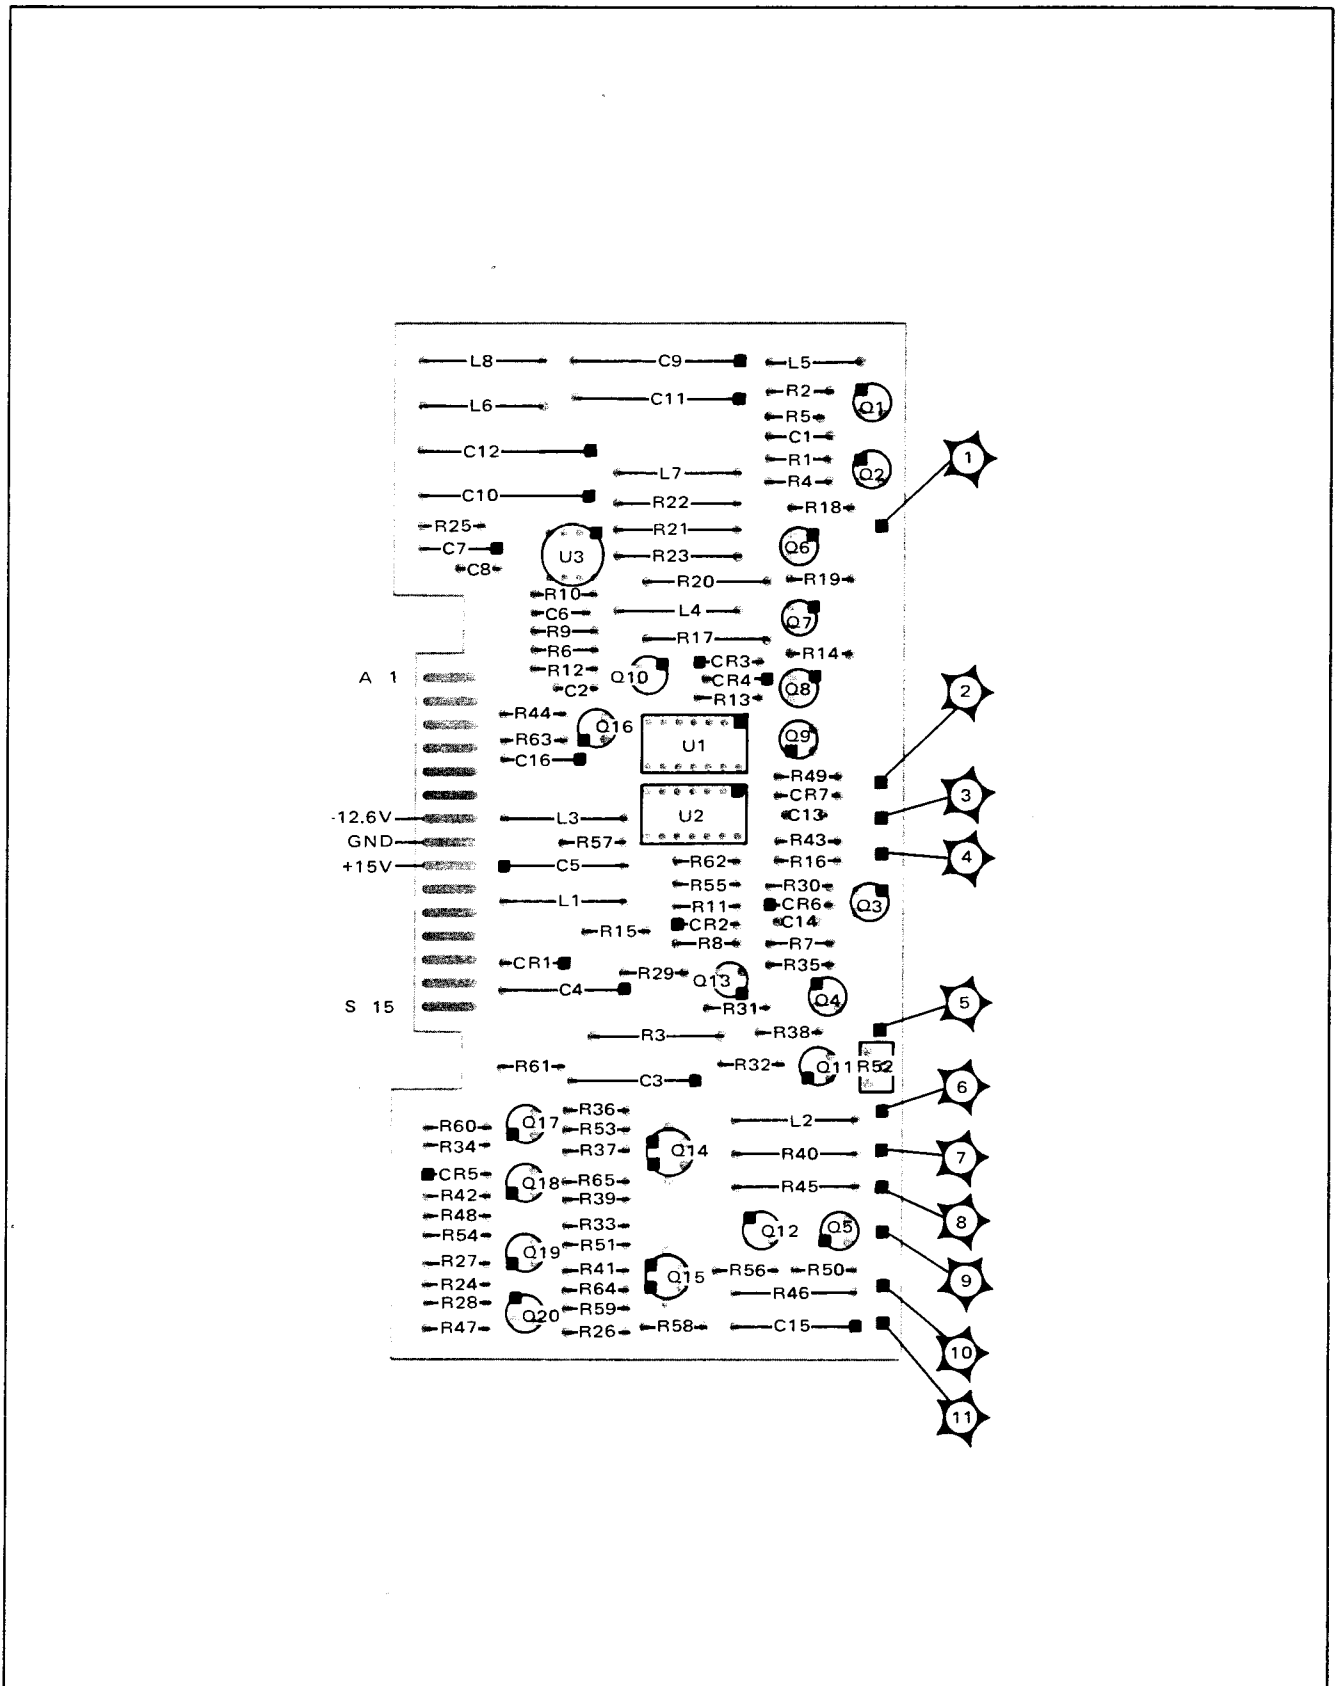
A10 Modulator Driver, Parts Location (CHANGE 2)
